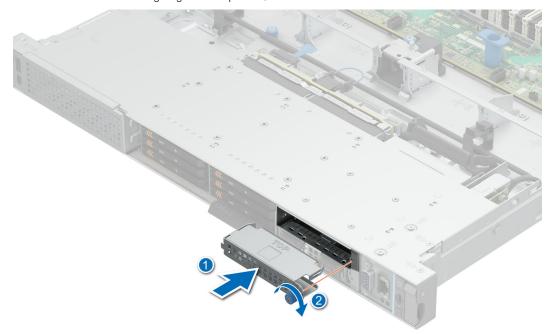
Installing an BOSS-N1 DC-MHS module filler bracket
